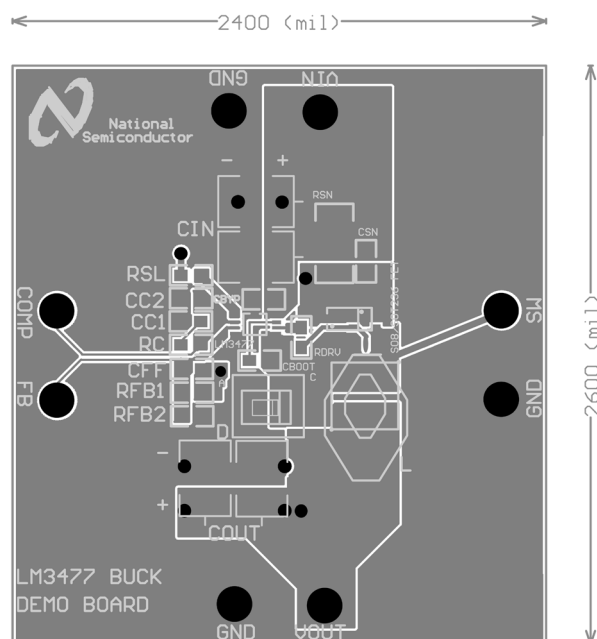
LM3477 Evaluation Board PCB Layout (Top Side)
